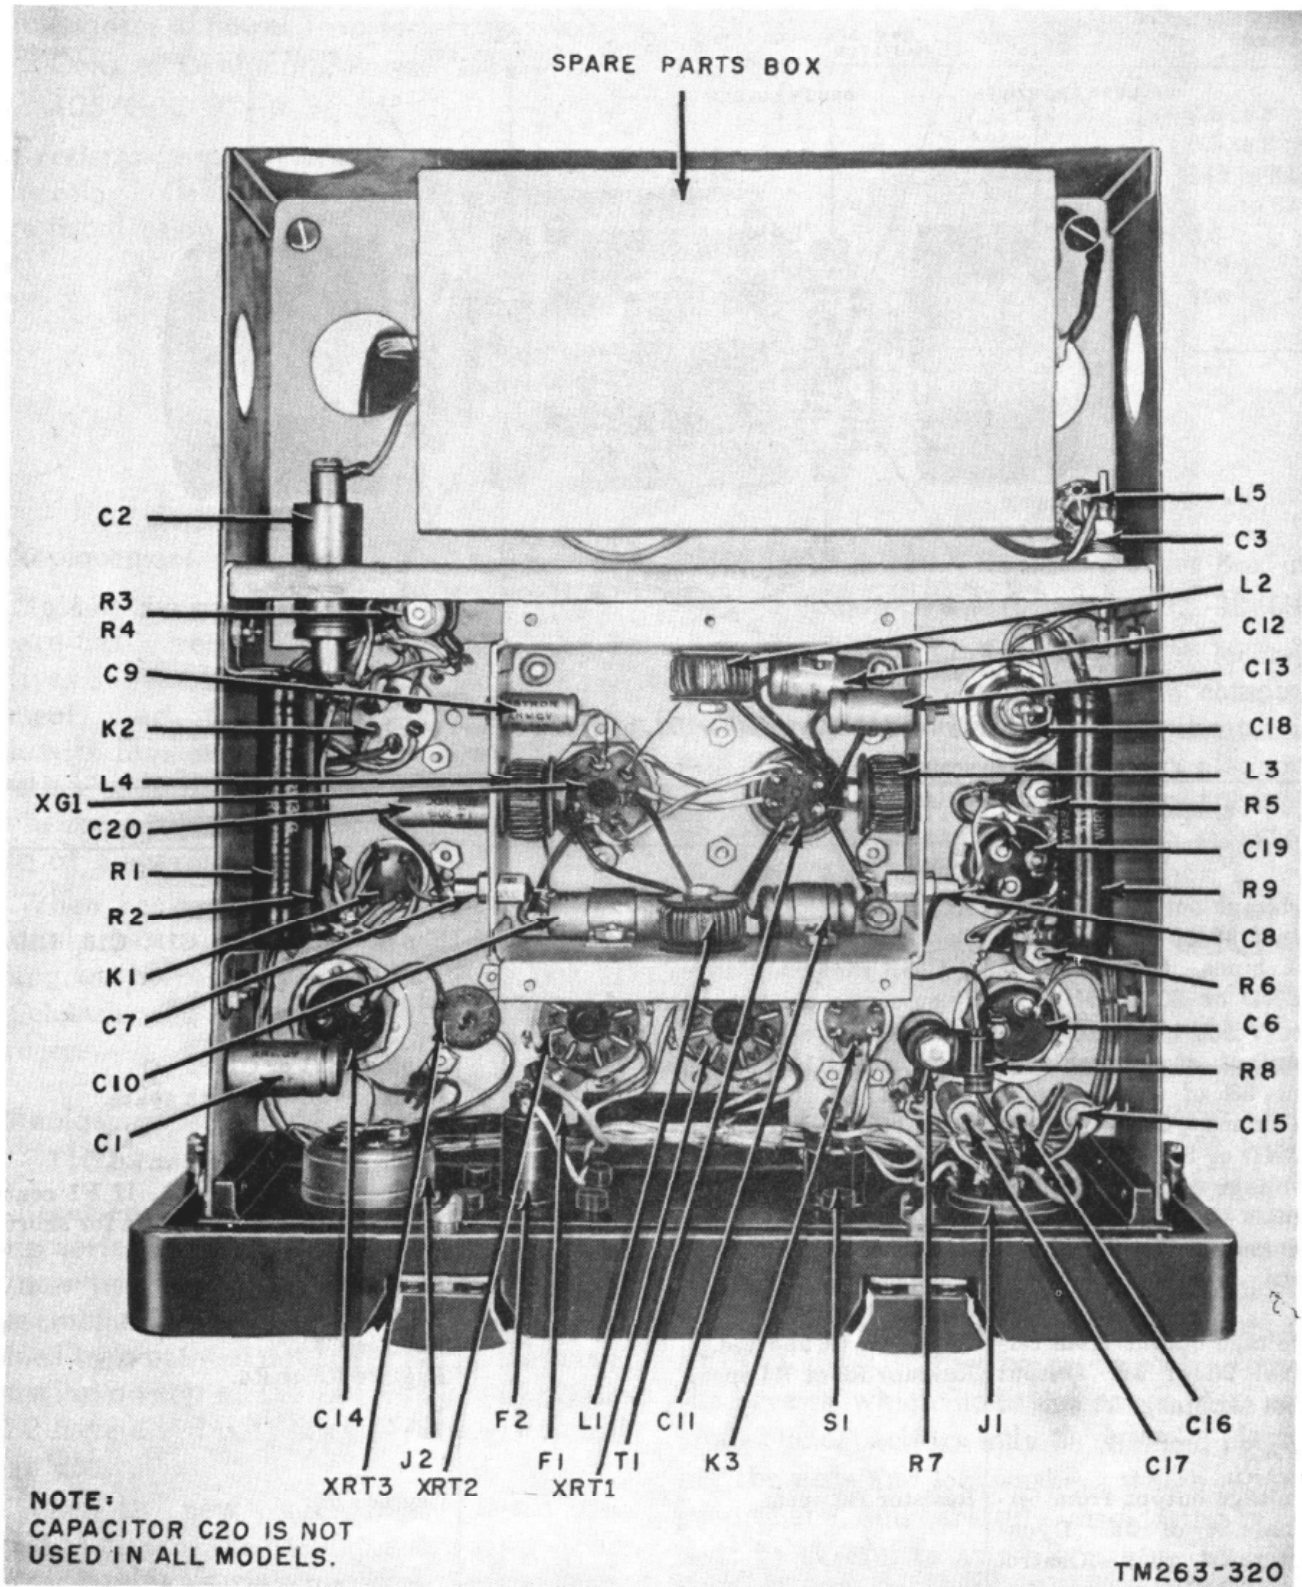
Dynamotor-Power Supply DY-105/GRC-9X, bottom view of chassis with filter box cover removed.
